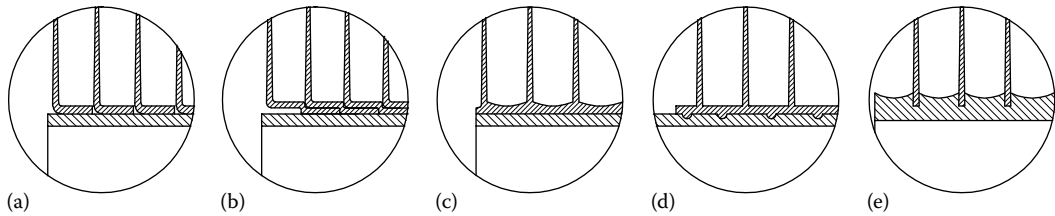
Tube-fin geometry—(a) welded single L footed, (b) welded double L footed, (c) extruded, (d) serrated, and (e) embedded.
